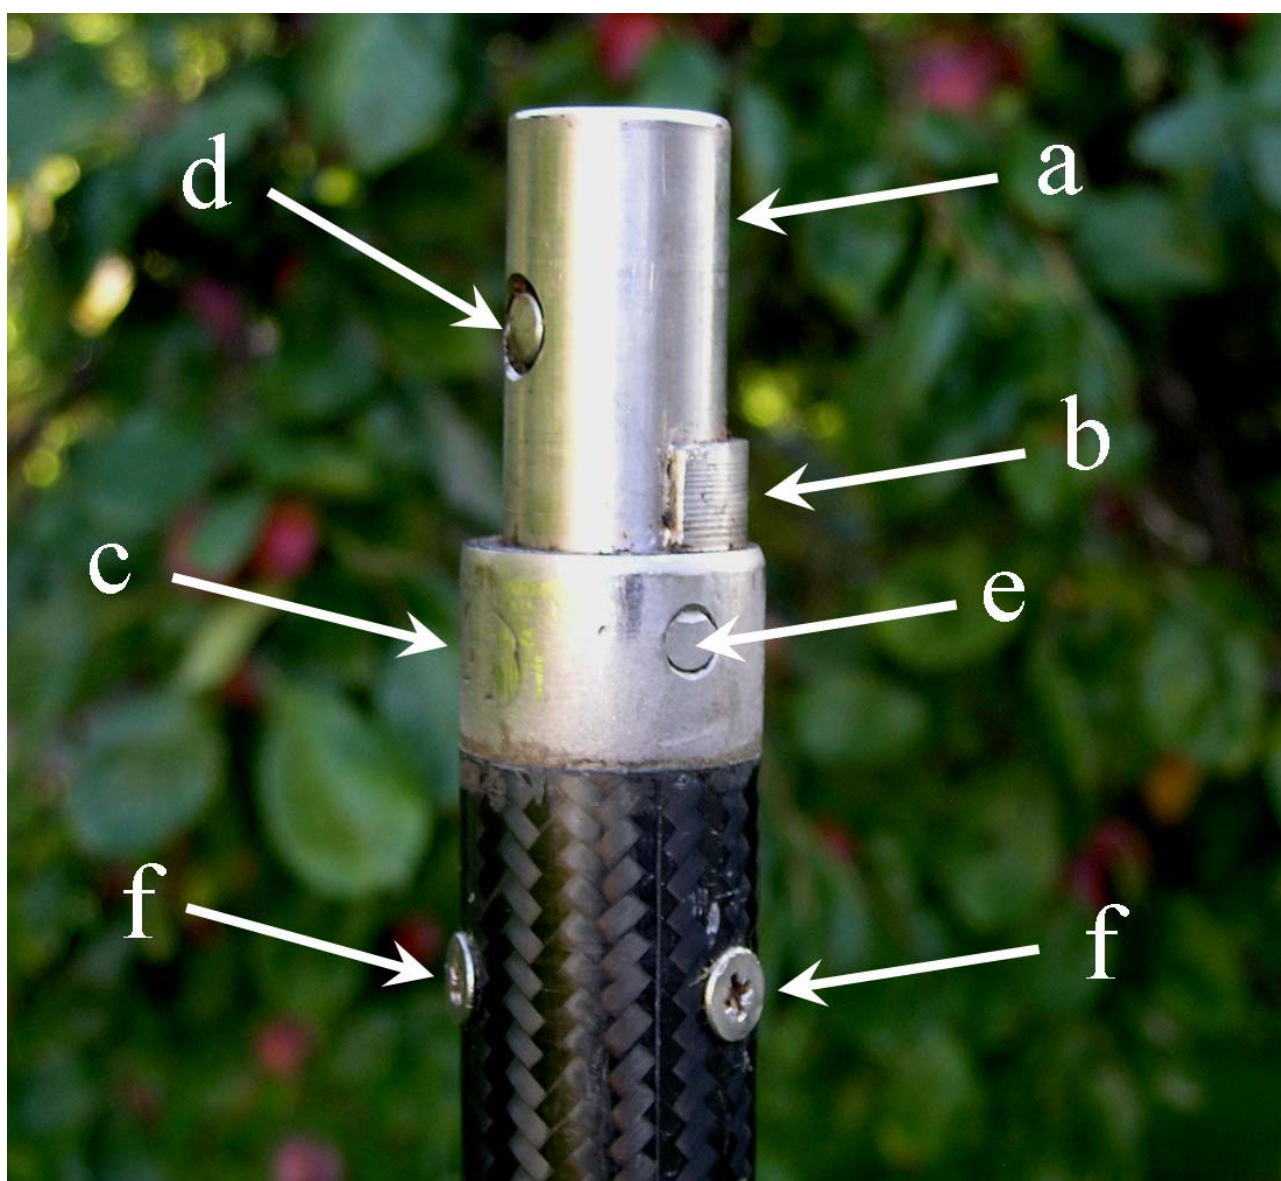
Male end of an extension rod showing details of the coupling: central tap (a), lug of inner tube (b), outer tube (c), Allen lock screw (d), securing pin (e) and two of the three securing screws (f).
